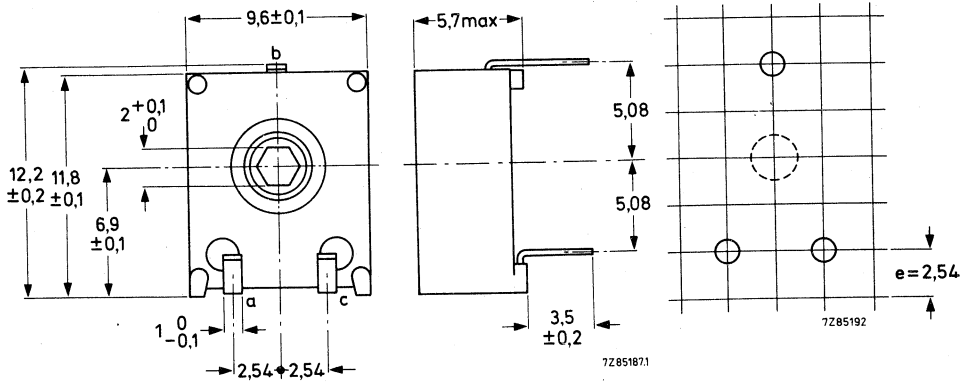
Horizontal mounting, version with hexagonal recess (insulated cold wiper, b).
